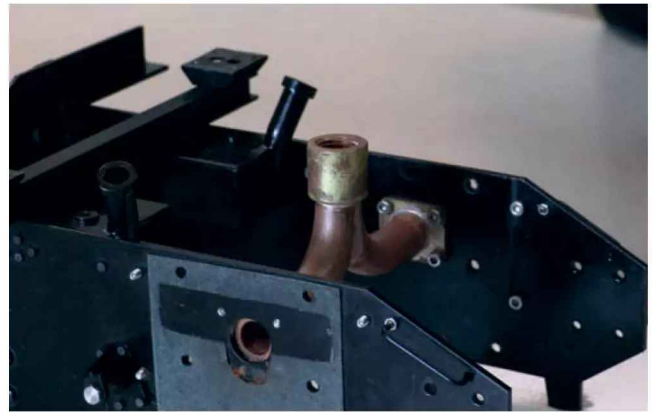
The sandbox will need to be removed before fitting the smokebox saddle.
